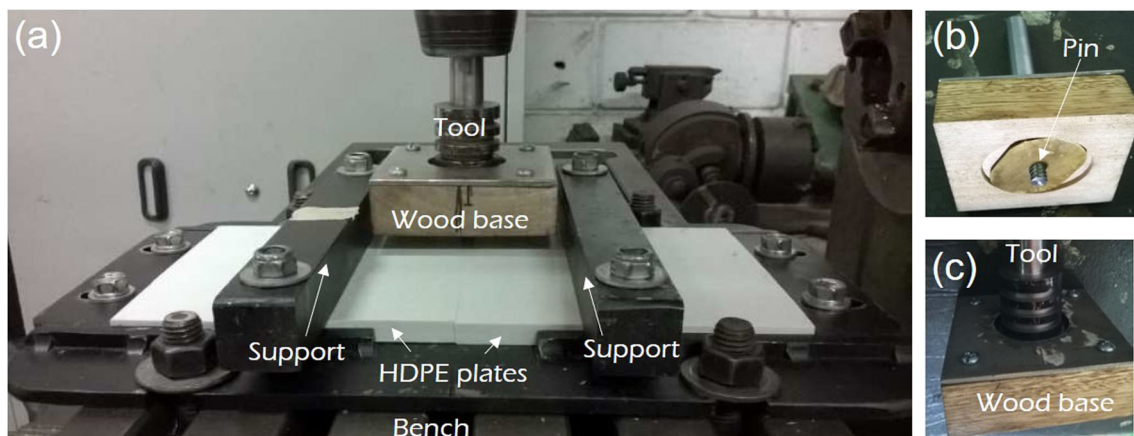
HDPE plates clamped on the bench of the milling machine using a specially designed support. a General view of support. b Ring-wing. c Wood scraper
